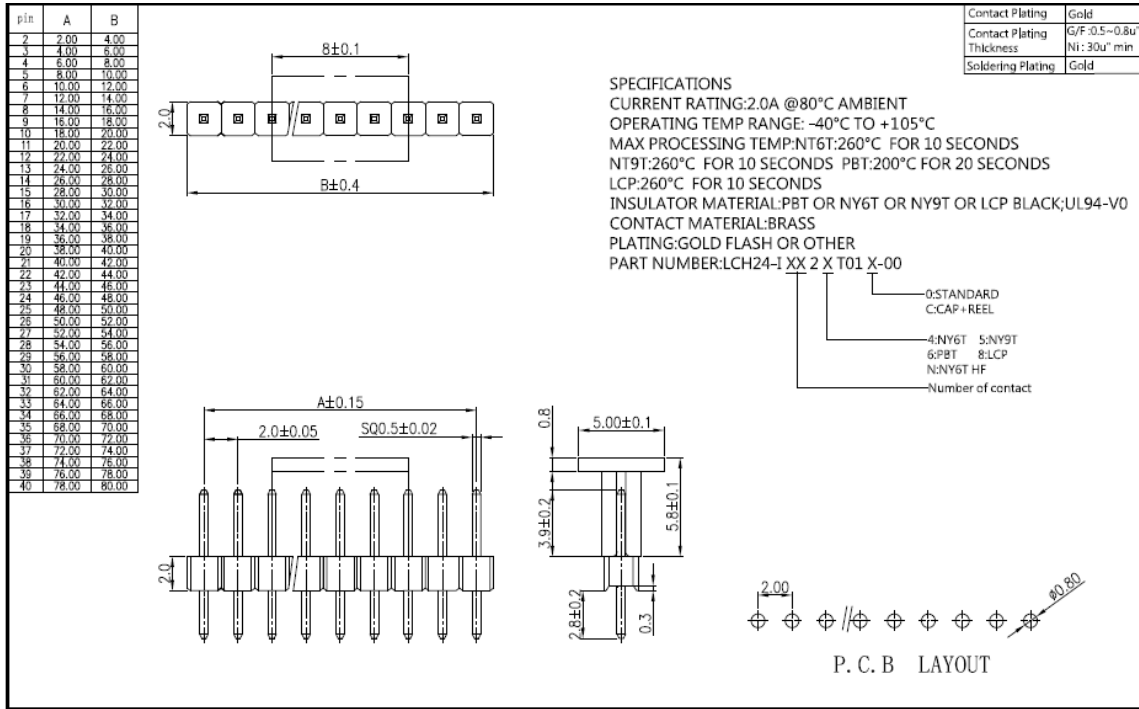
Pin Header DIP 1*2P Drawing (J1/J2)
